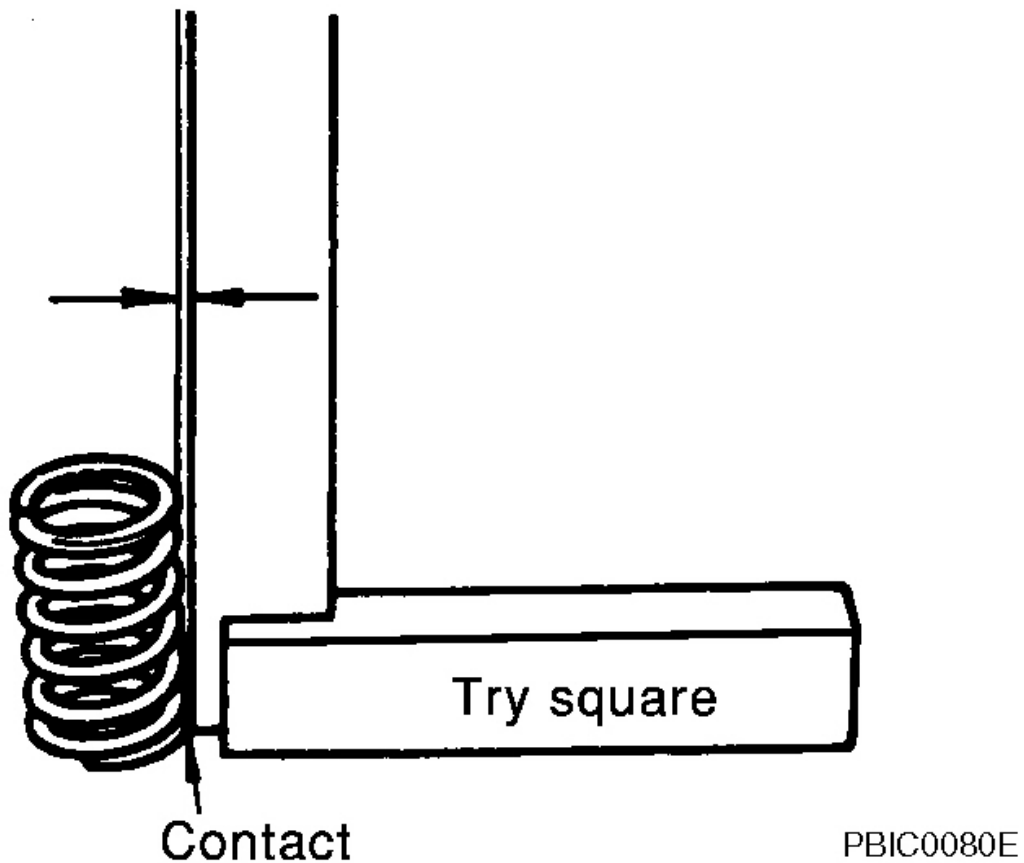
Setting Try Square Along Side Of Valve Spring And Rotate Spring
